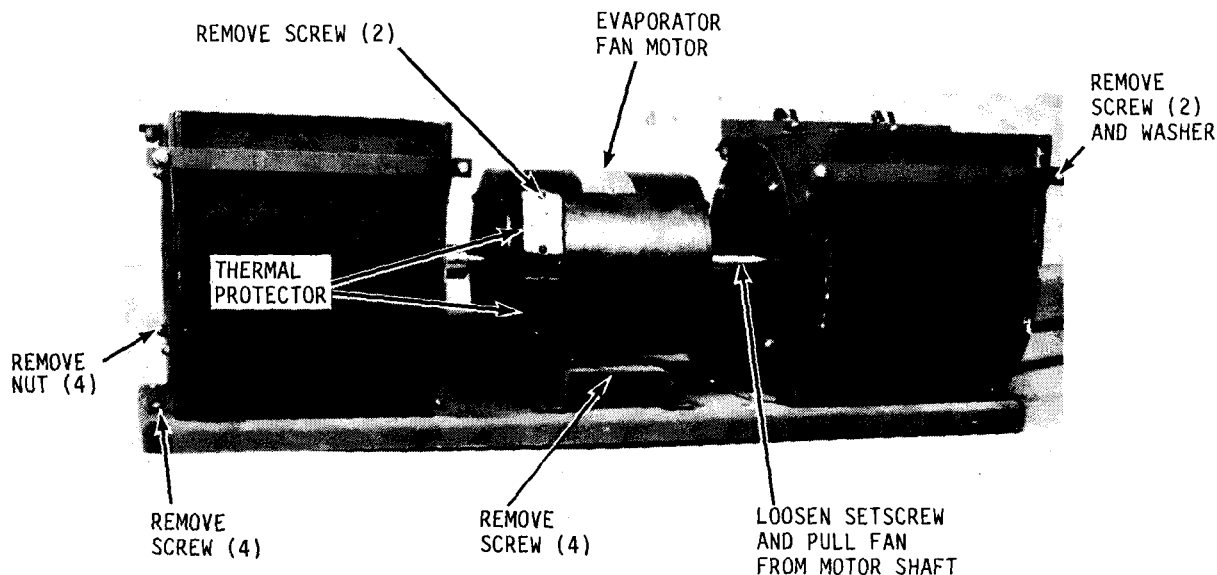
Evaporator, fan, motor, and thermal protector, removal and installation
